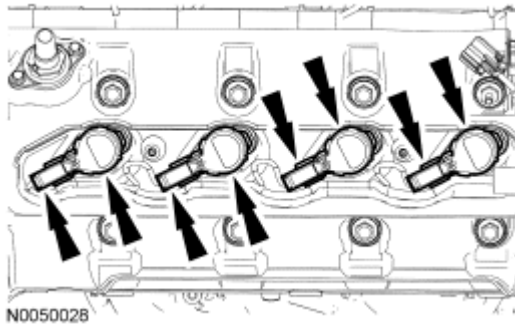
Disconnecting LH Coil-On-Plug Electrical Connectors
